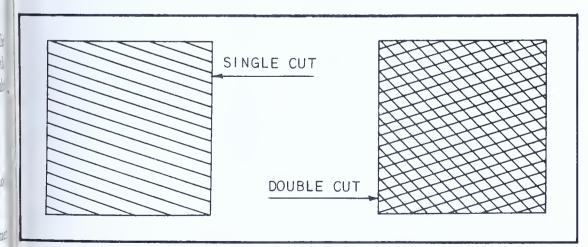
Single-Cut and Double-Cut File Surfaces
